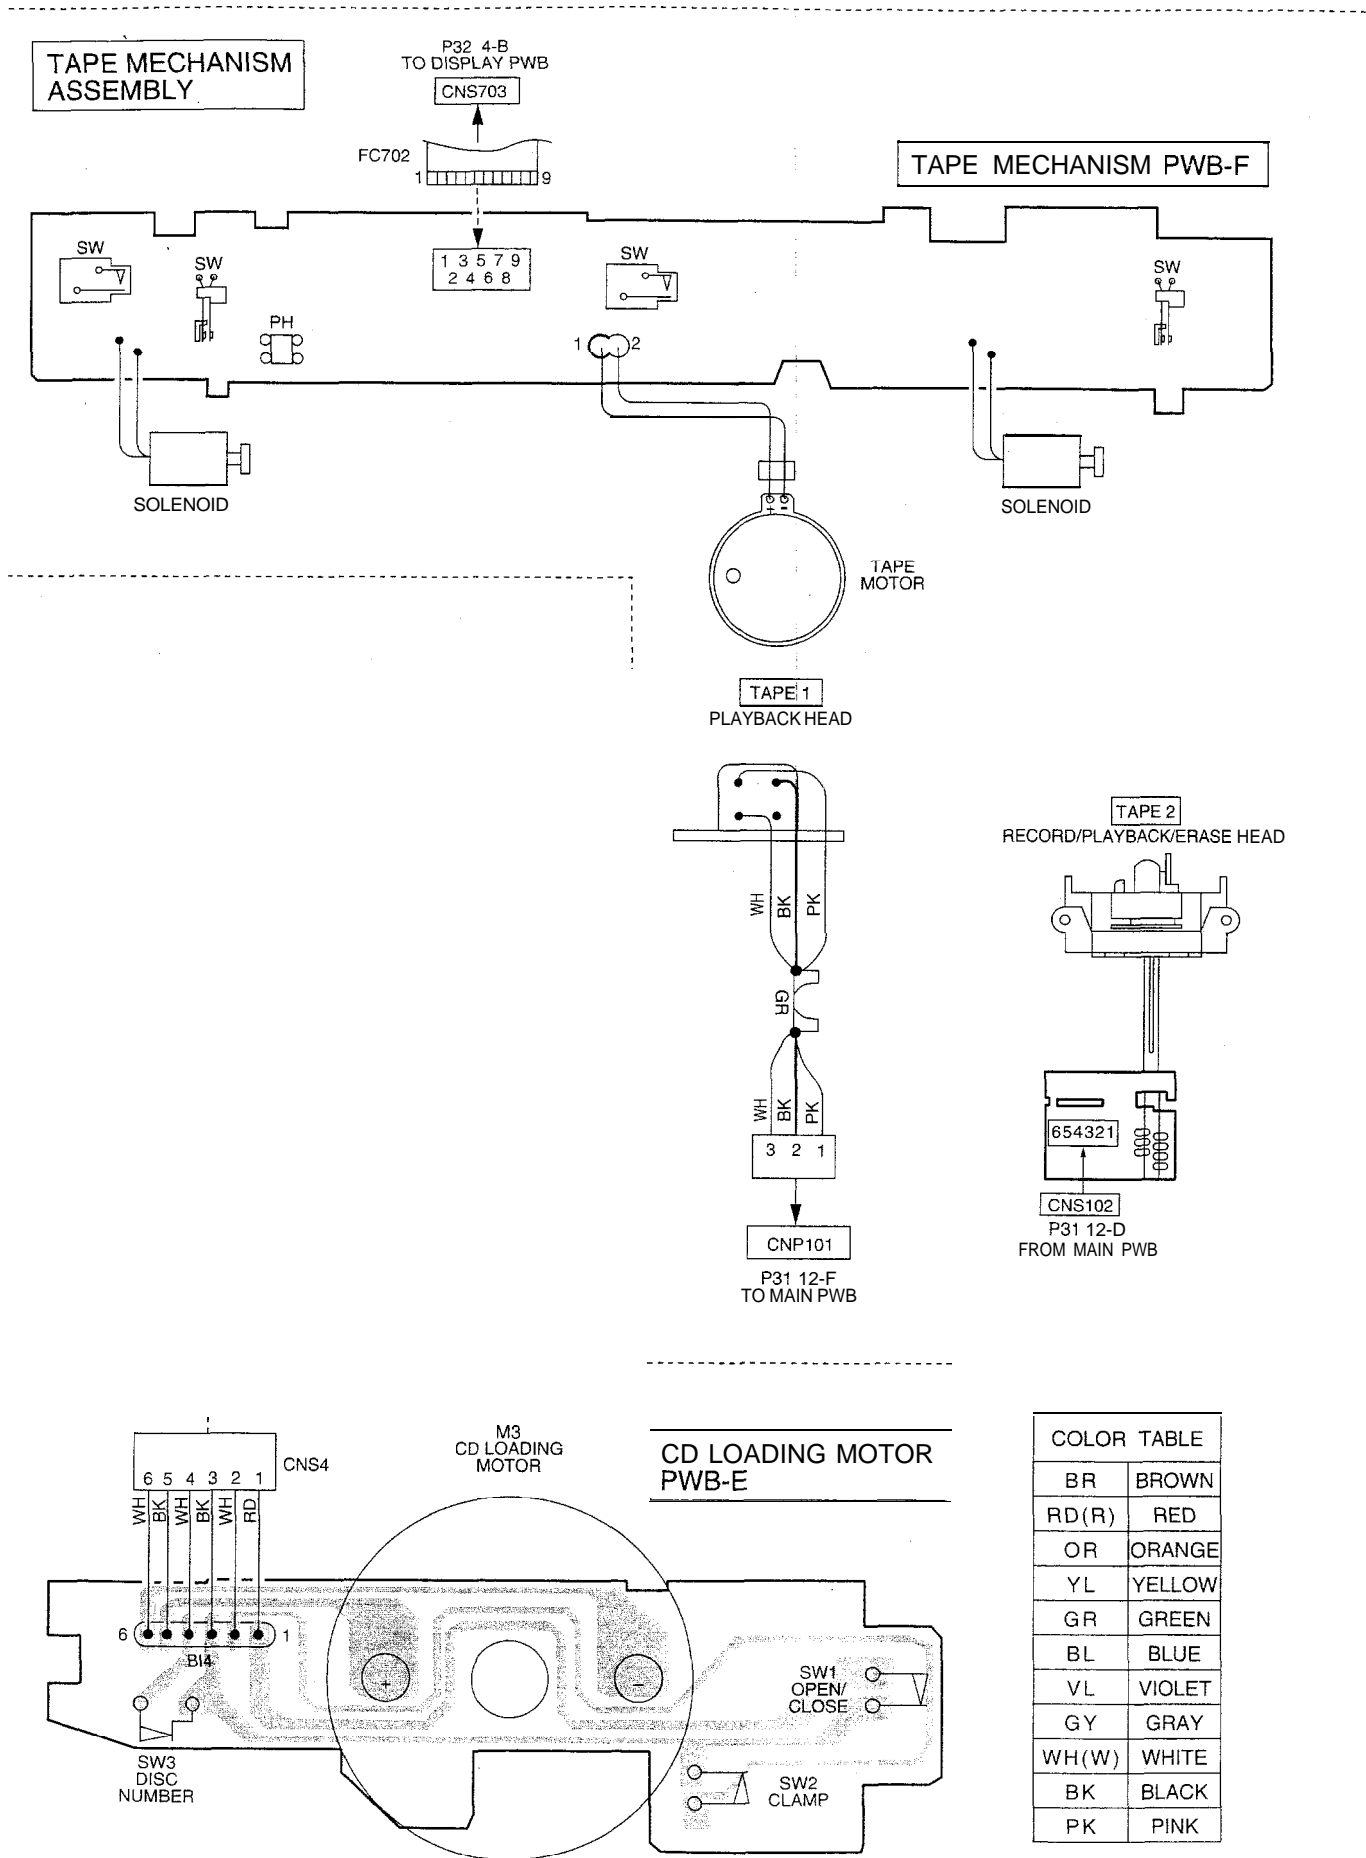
WIRING SIDE OF P.W.BOARD (9/9)
